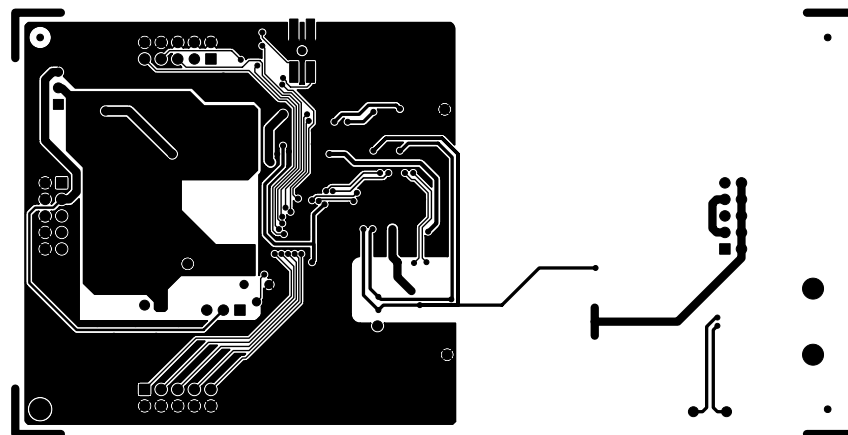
Si321xM-DCQ-EVB with Si3201 Solder Side
